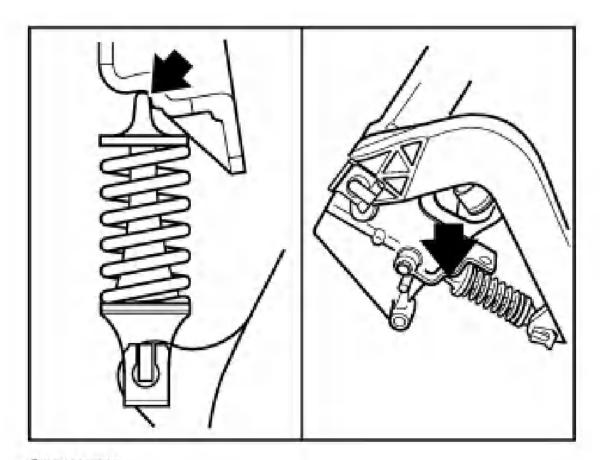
Removing Locking Clip For Shaft Pin Of Clutch-Sensor Cylinder Courtesy of BMW OF NORTH AMERICA, INC.
